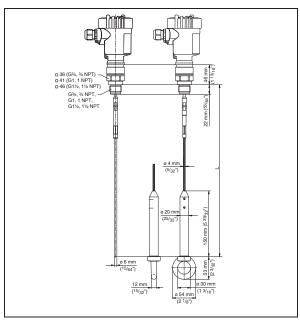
VEGAFLEX 61 - cable and rod version with thread
